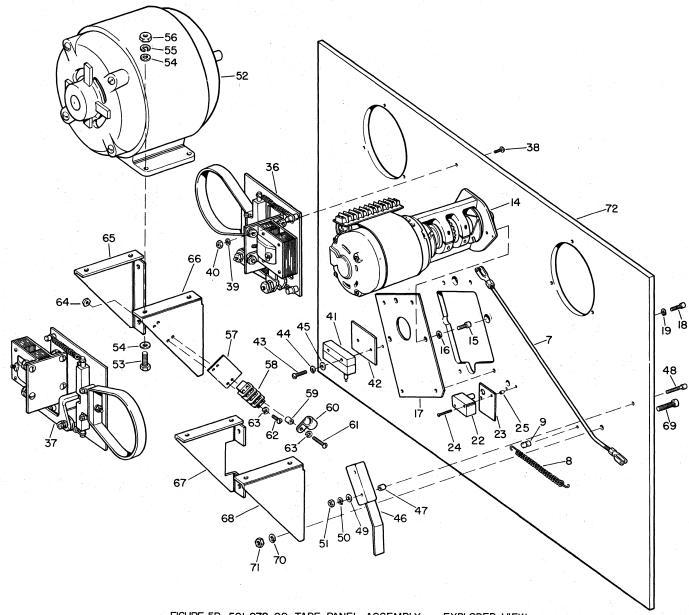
B 50I 972 OO TAPE PANEL ASSEMBLY - EXPLODED VIEW
